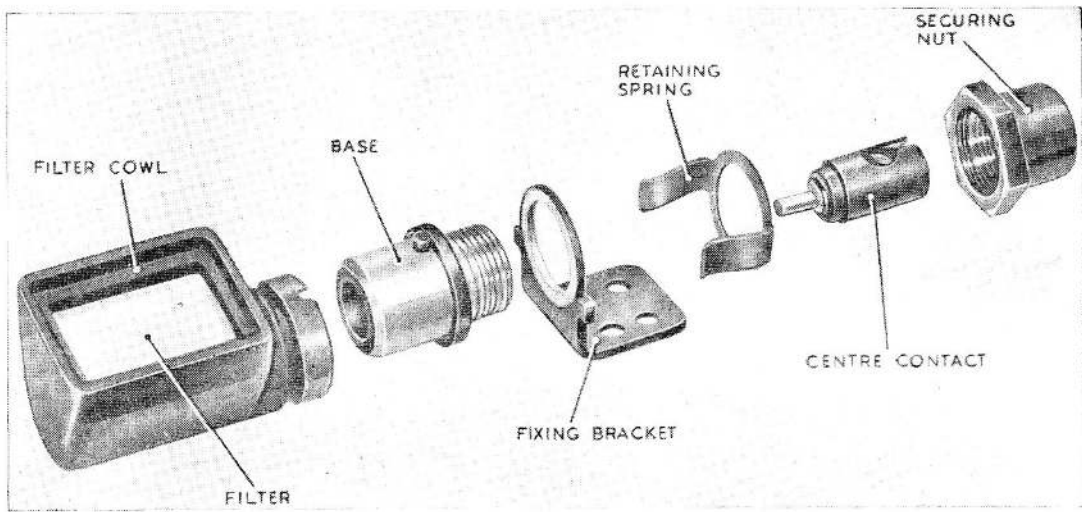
Lamp, cockpit, floodlight, Type D (exploded view)
